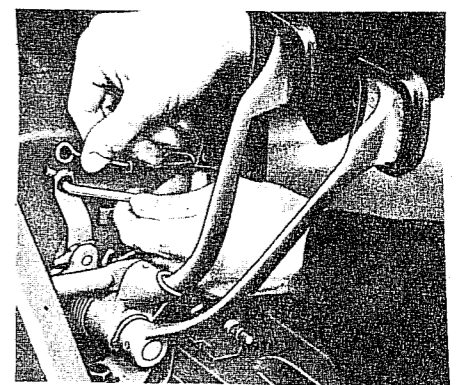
Attaching the throttle cable to the accelerator pedal (LHD cars).
